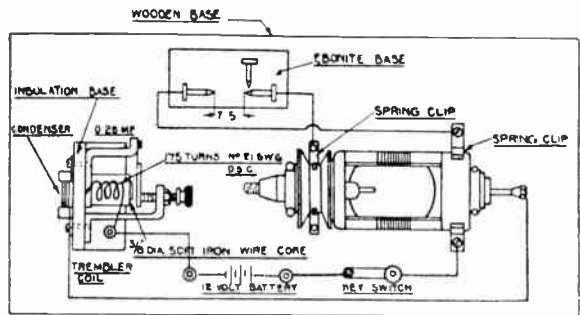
CONNECTION DIAGRAM FOR MAGNETO ARMATURE TESTING SET.
